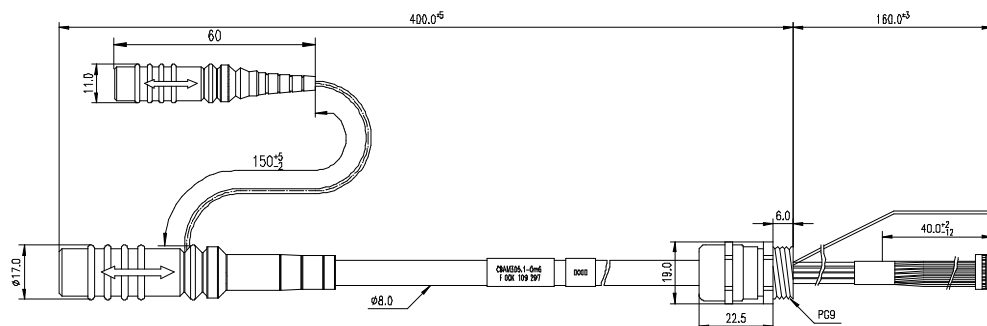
CBAM305.1-0m6 Cable - Dimensions
